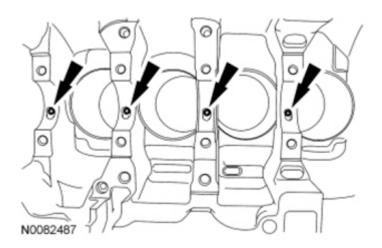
Locating Oil Squirters Courtesy of FORD MOTOR CO.
